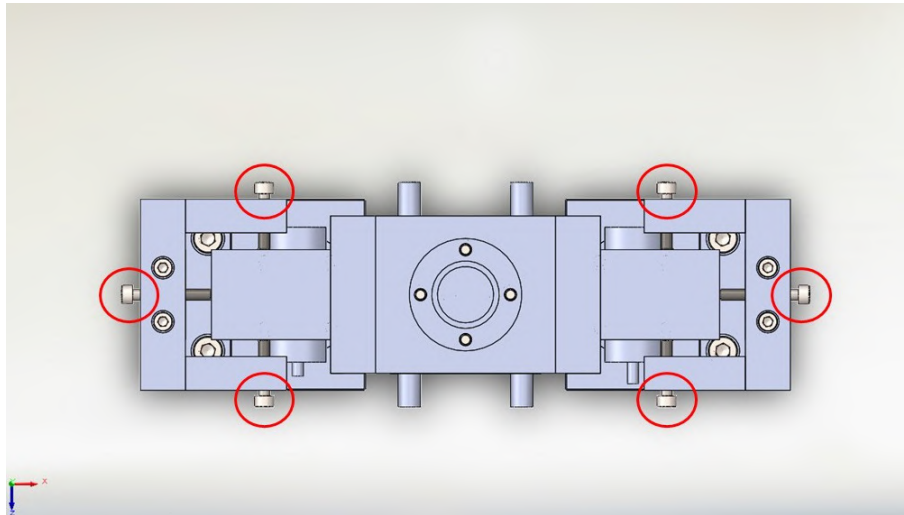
Top view of the assembly. Calibrating screws are marked in red.
